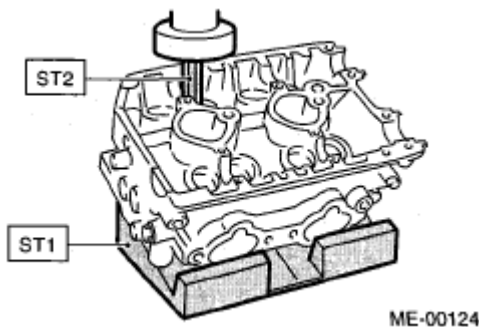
Identifying Cylinder Head Table ST1498267600 And Valve Spring Remover ST2 499718000
